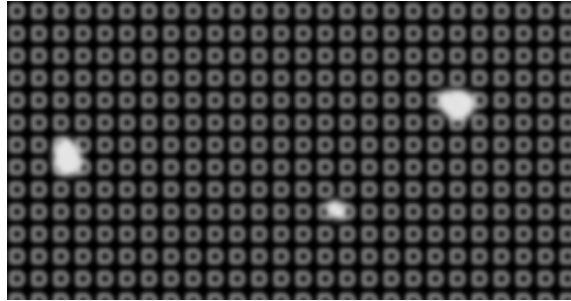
New image under inspection and its building block calculated from Eq. 1
